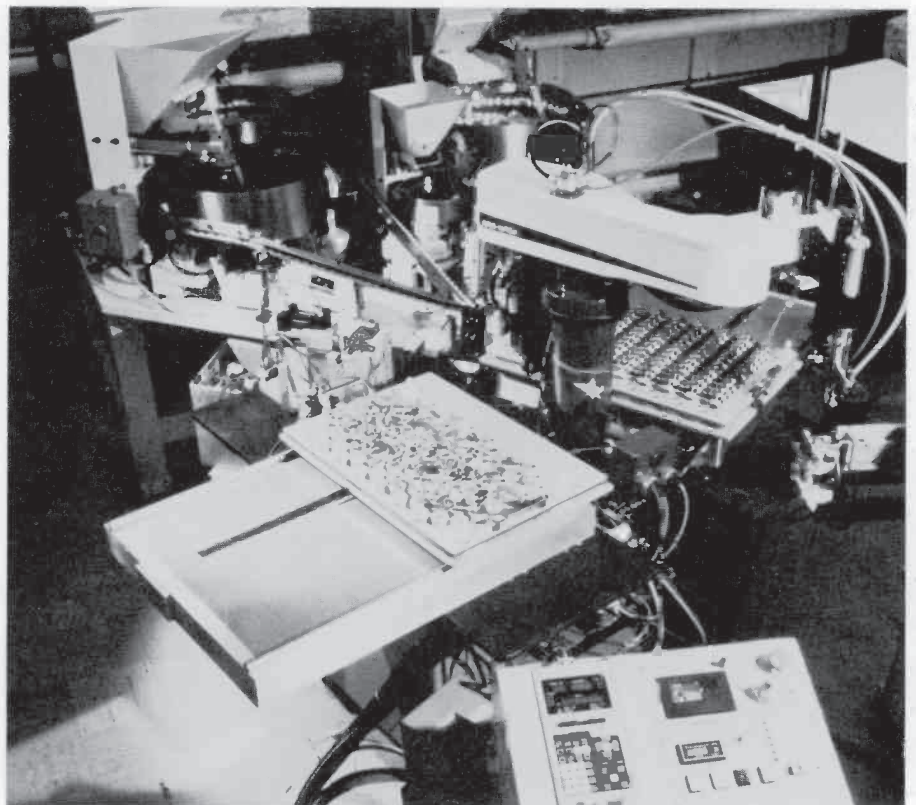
The Hirata gearbox assembly system, without its protective Plexiglas envelope, is shown in the Laboratories environment.
